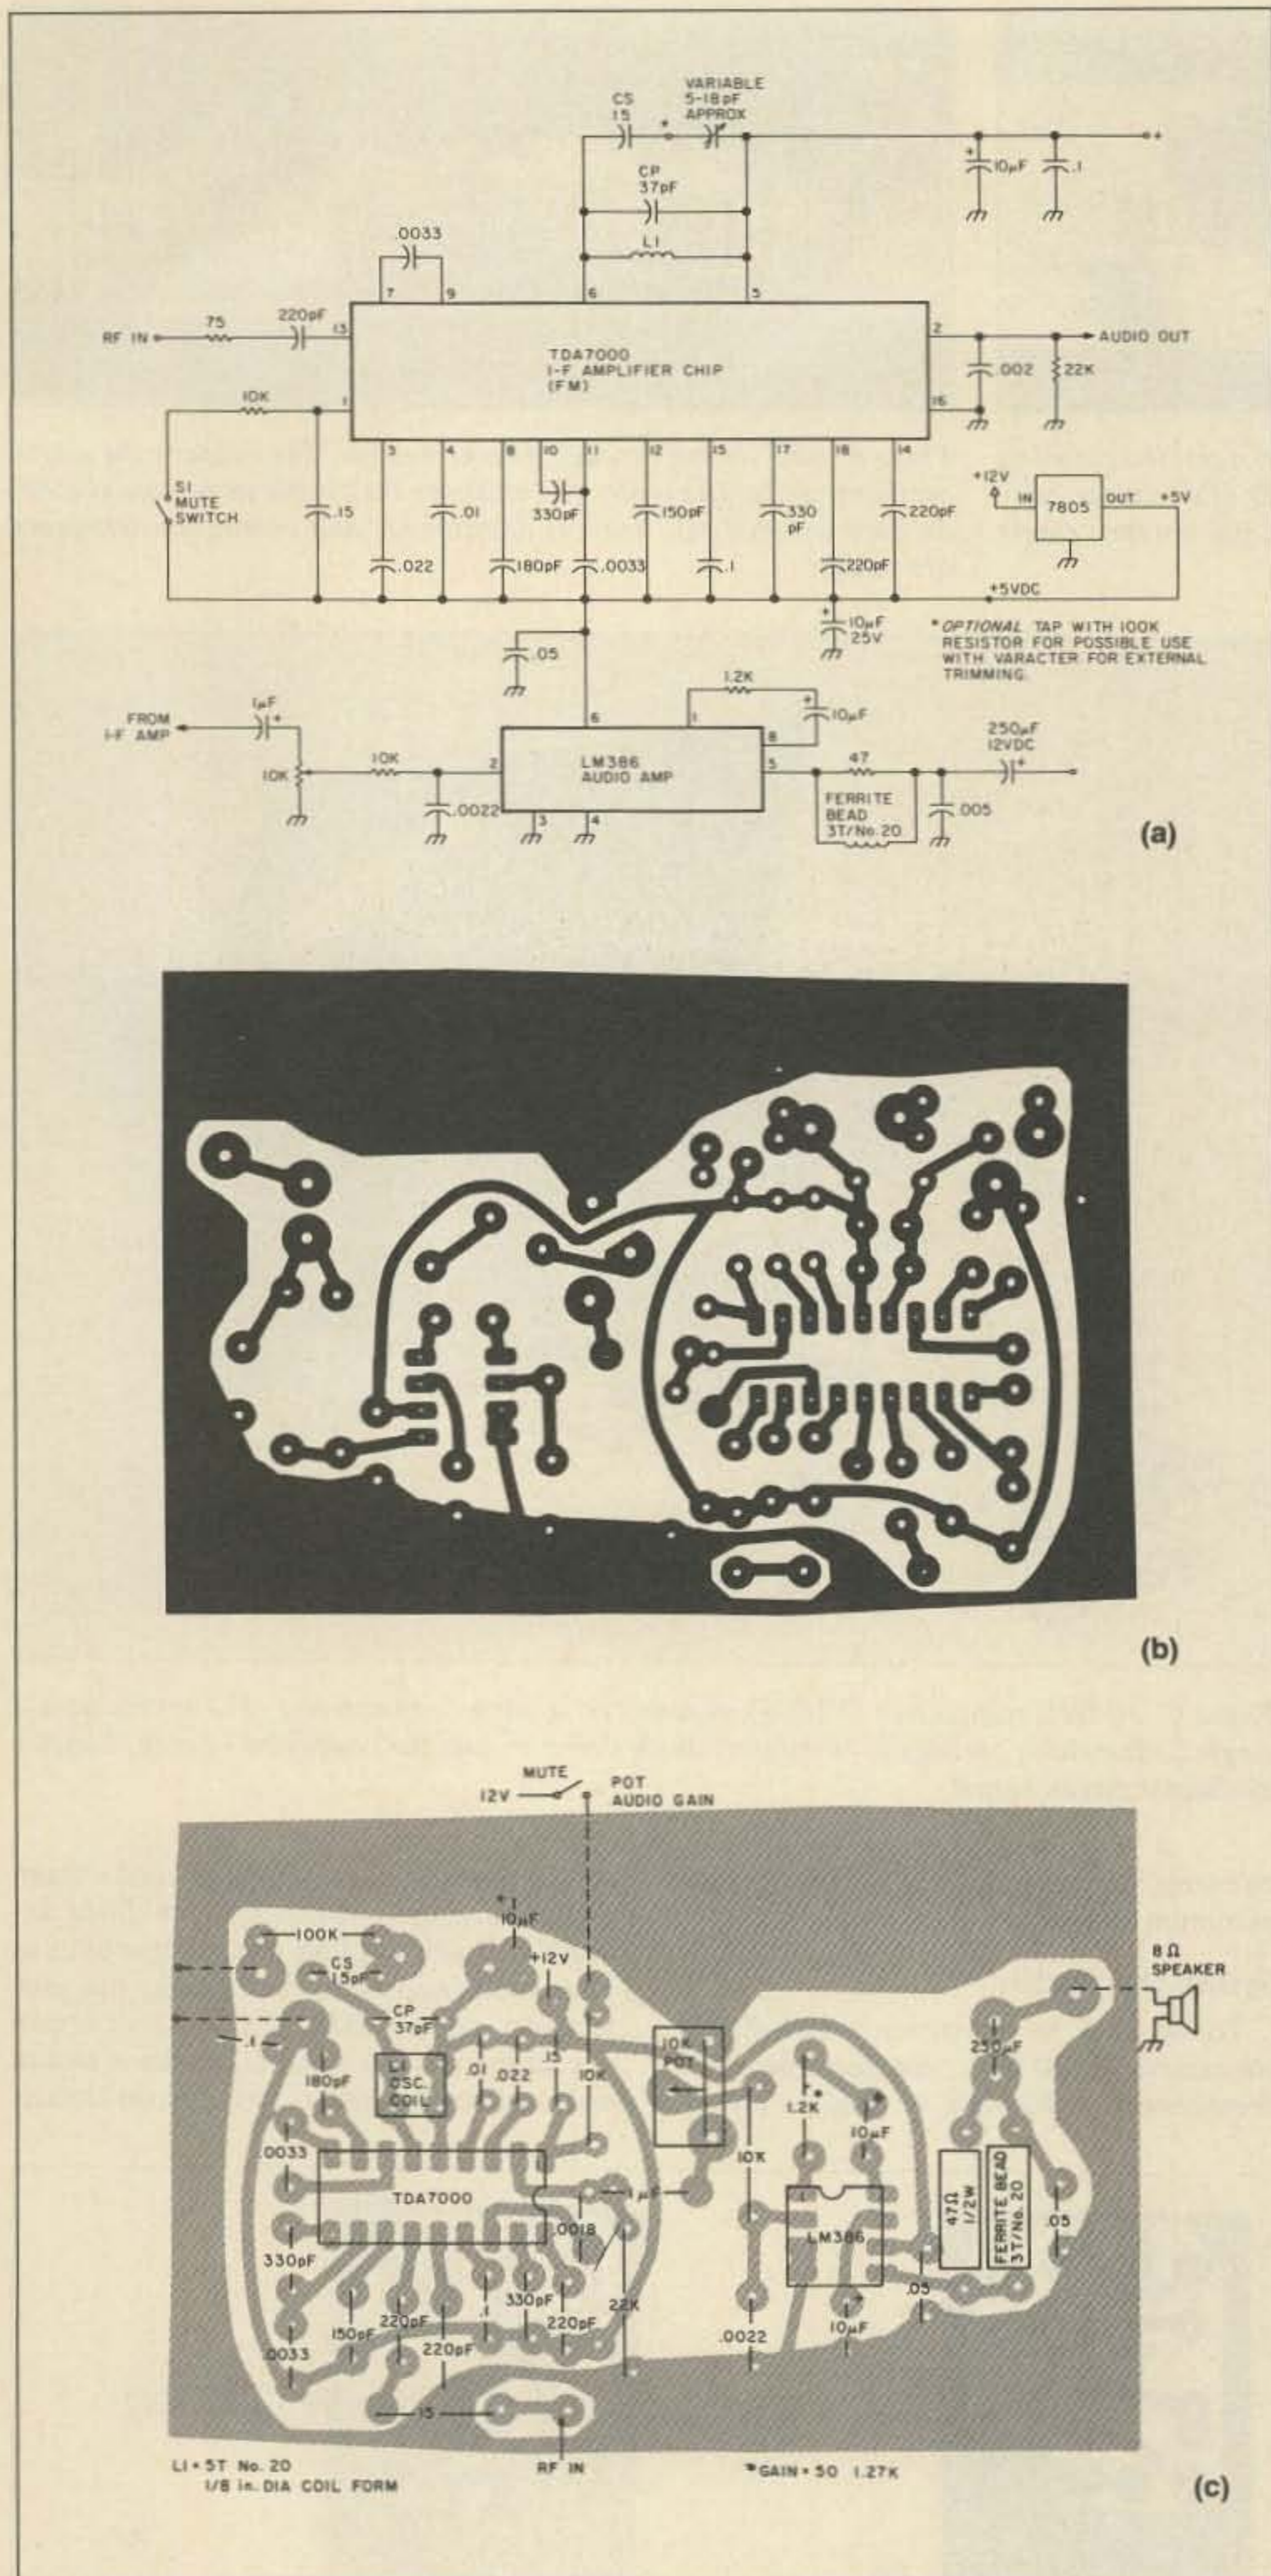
30-MHz FM receiver i-f amp (a) schematic, (b) circuit board, foil side, and (c) parts placement.
